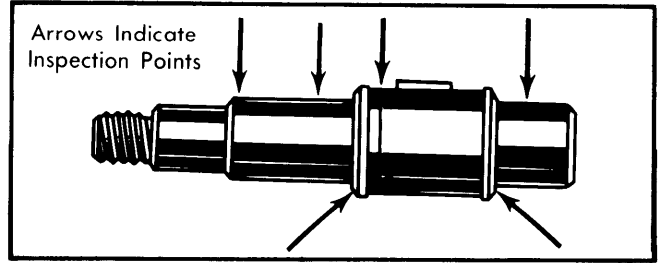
Rotor Shaft Sub-Assembly Inspection Points
